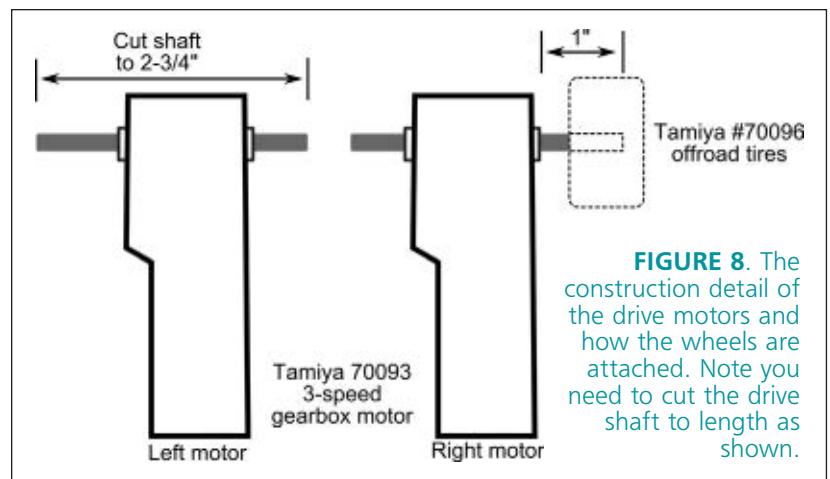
The construction detail of the drive motors and how the wheels are attached. Note you need to cut the drive shaft to length as shown.
